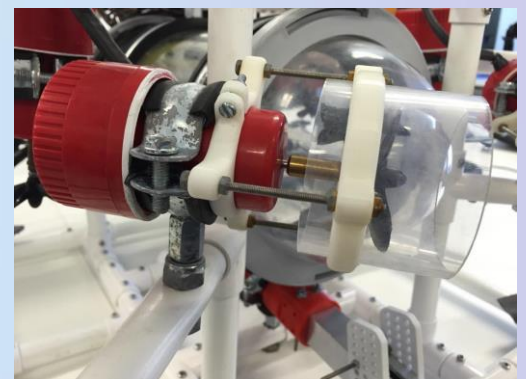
Motor with shroud mounted on frame via pipe clamp.
